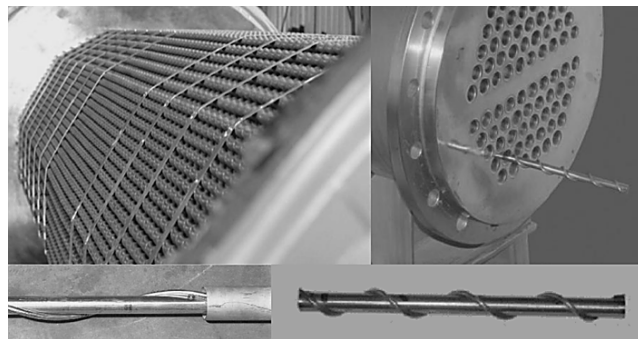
Screw-type intensifiers and external wire winding on the tubes of heat exchangers produced by the Brown Fintube Company.
